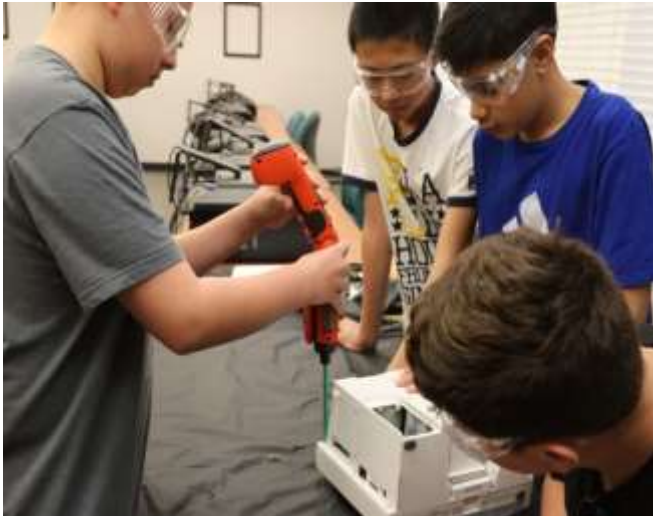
(At Left) Ethan unscrews the panel that holds together the rear housing assembly and the front housing assembly.
